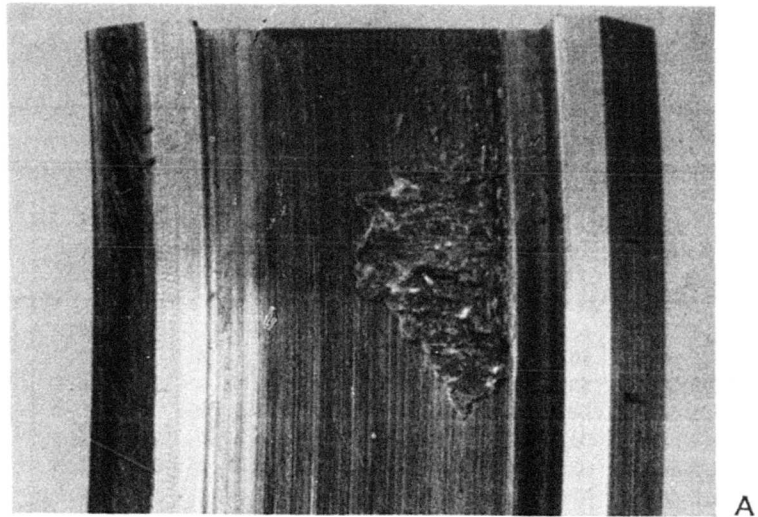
ROLLERS OF BEARING NUMBER 1, SIDE 1A,
